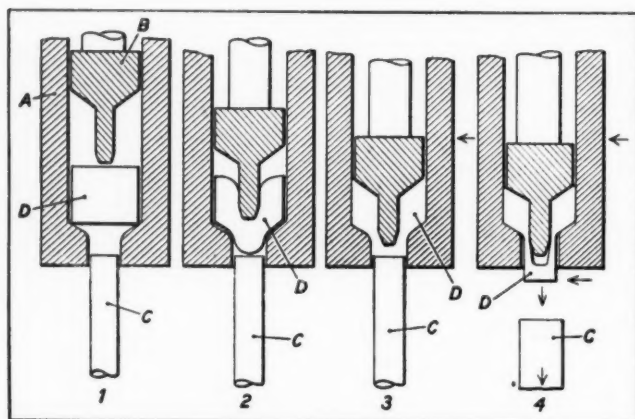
Diagram Showing Method of Producing Shell Forgings by the Extrusion Process
